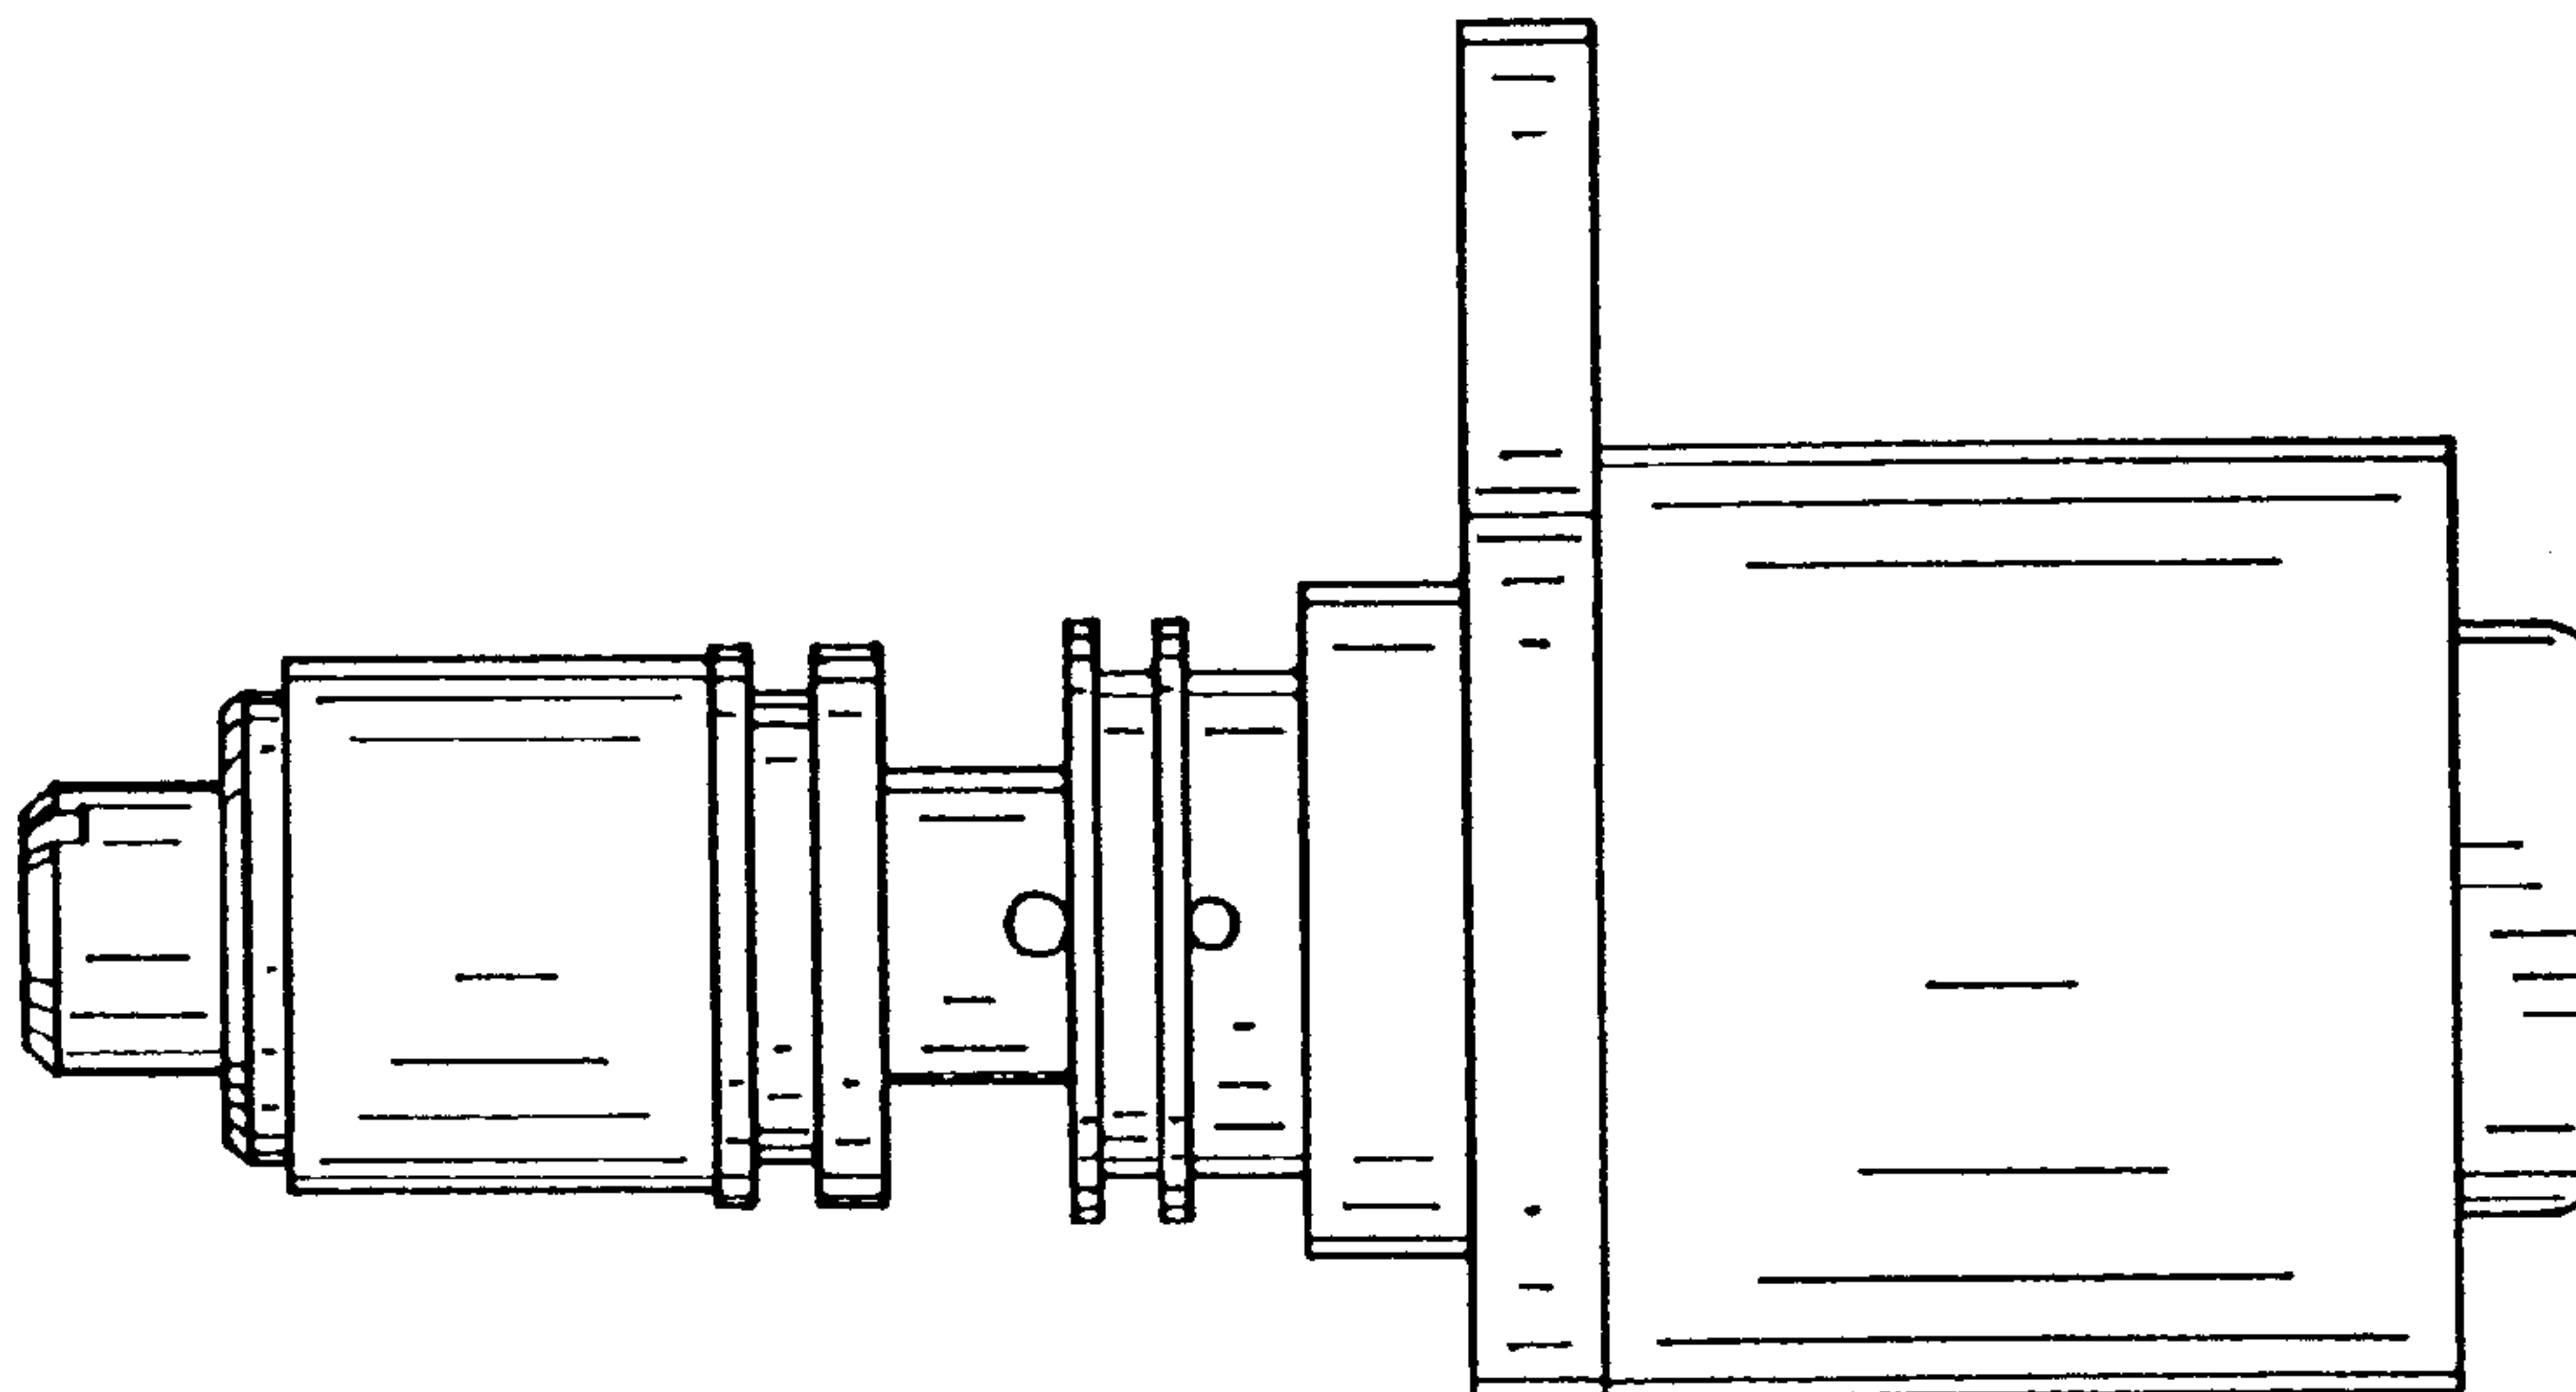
is a bottom plan view of the compressor including an electromagnetic control valve for a compressor, as shown in FIG. 1.
